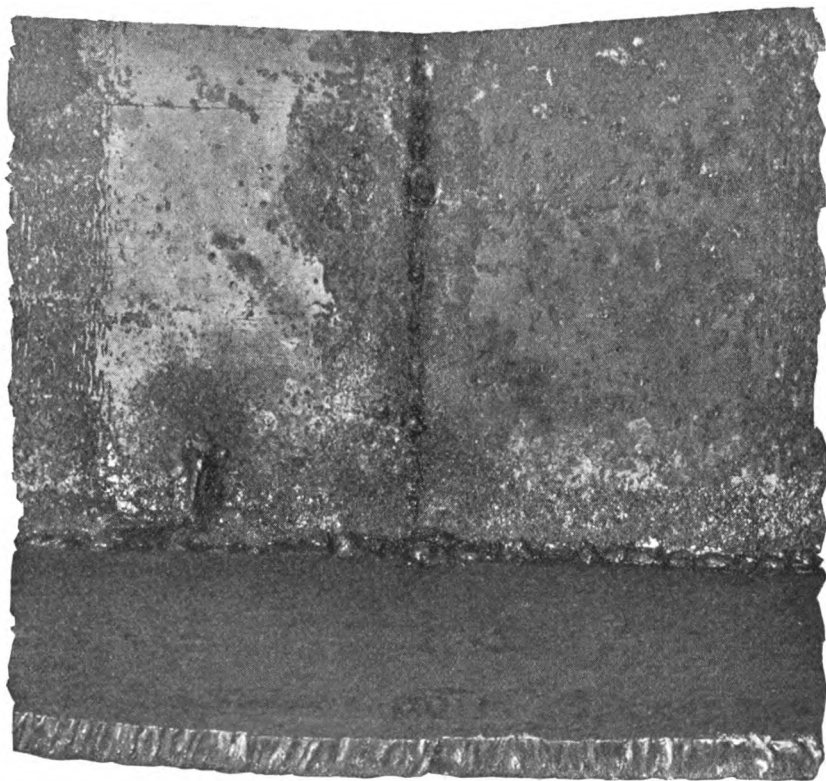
WELDING OF HEAD TO SHELL. NOTE THE ROUGH CHARACTER OF THE WORK.
